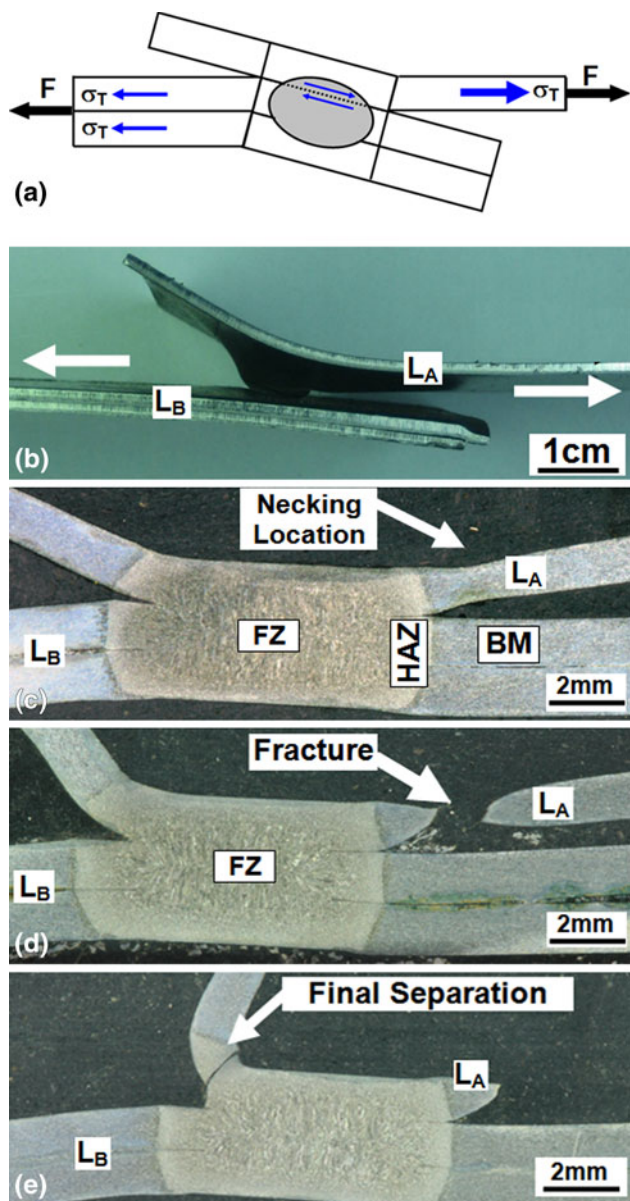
Type A joint design. (a) A simple model describing stress distribution at the interface of the sheets and at weld nugget periphery, (b) pullout failure mode, weld nugget is pulling out from upper sheet, (c) macrograph of fracture cross section showing initial necking, (d) macrograph of fracture cross section showing failure in the base metal region of the one-sheet leg of the joint, (e) macrograph of fracture cross section showing final failure: L_A and L_B are one-sheet leg and two-sheet leg, respectively
